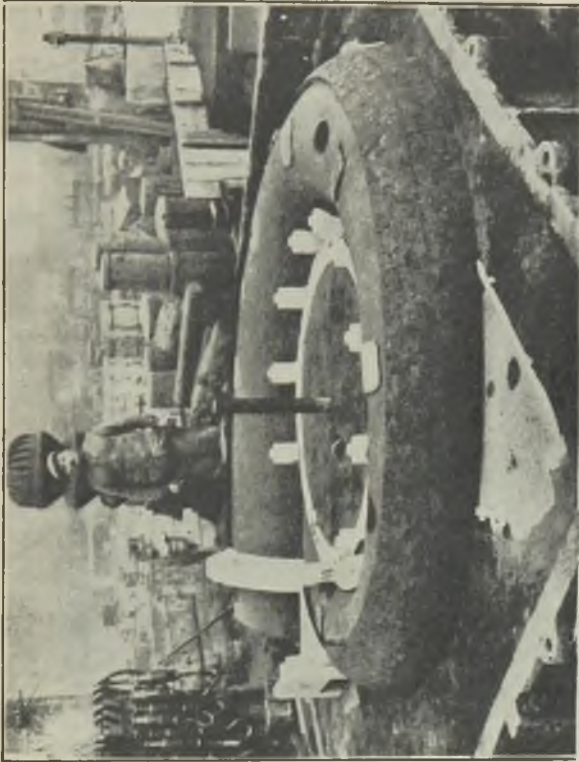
STRICKLE-MOULDING A WATER-TURBINE CASING.
